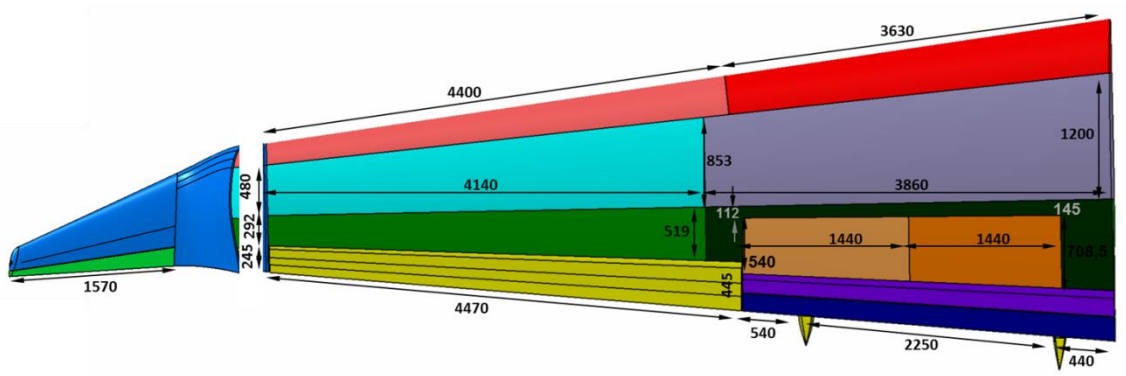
FTB#2 External Wing. Plan View Dimensions (As a reference only. Split the seal in several parts may be allowed).
